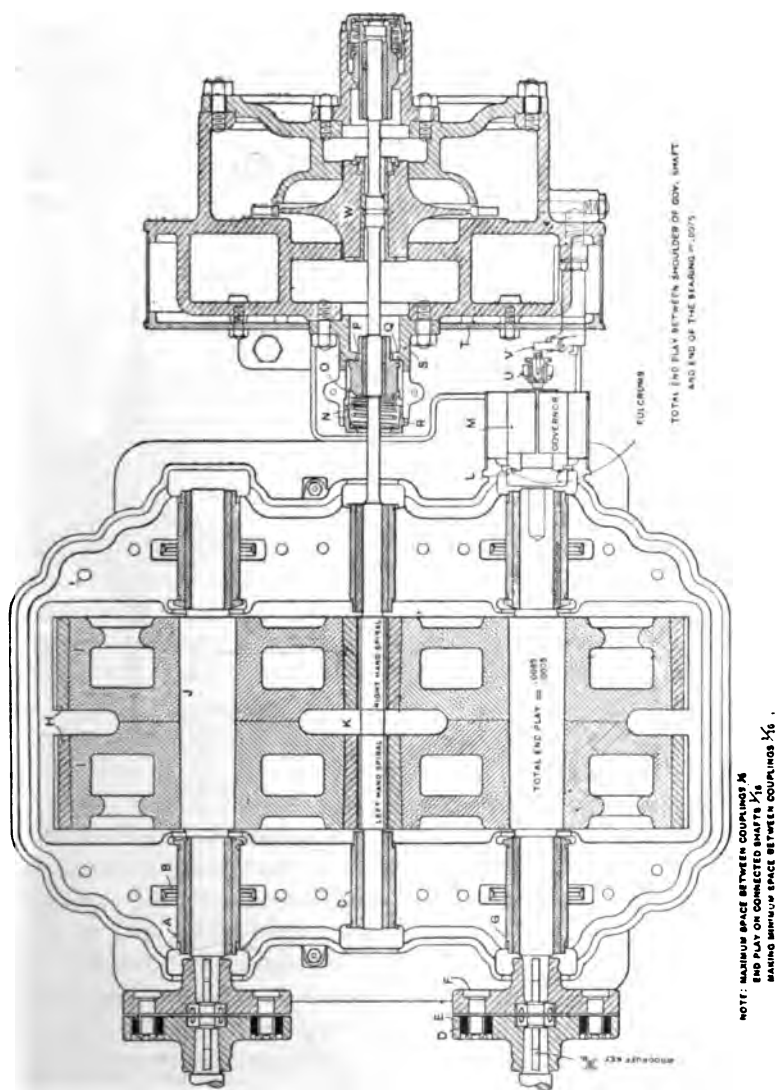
Horizontal Section through de Laval Steam Turbine.
